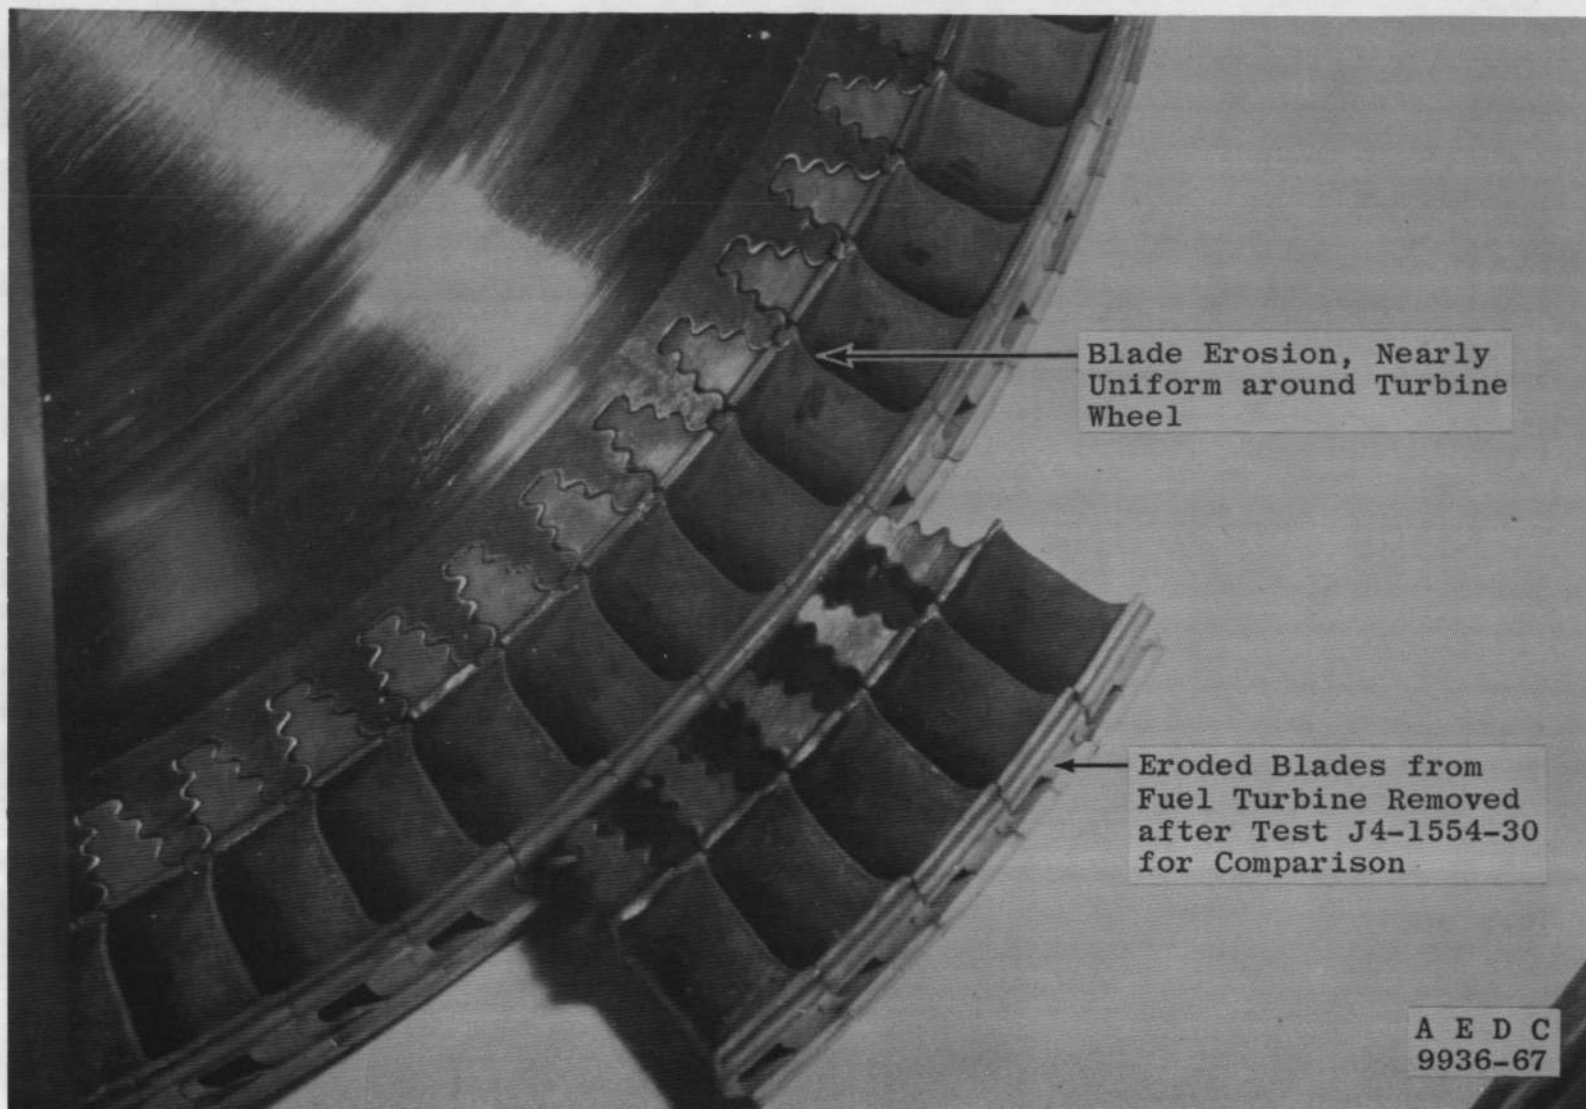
Fuel Turbine Blade Condition, Post-Test J4-1801-04
